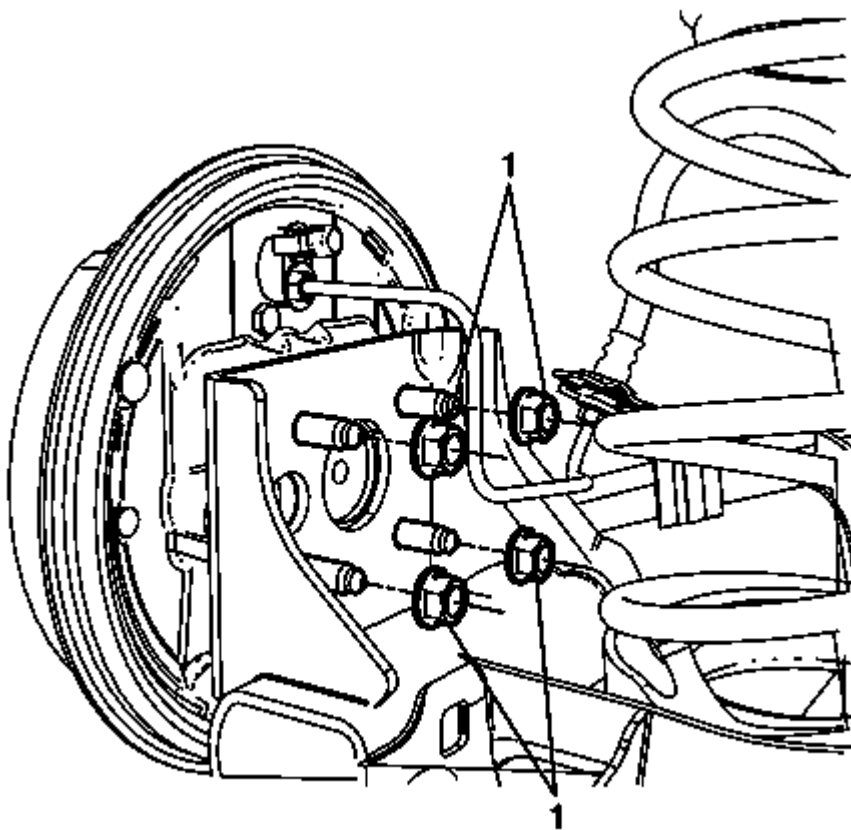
Wheel Bearing/Hub And Spindle Assembly And Rear Axle Retaining Nuts
